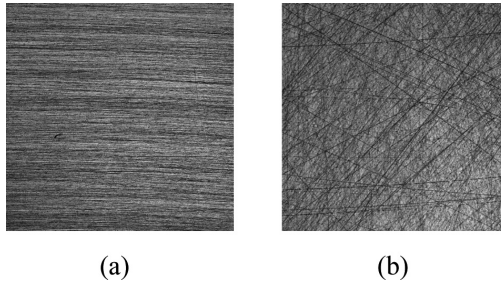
Machining pattern on (a) Sample 2 and (b) Sample 8
